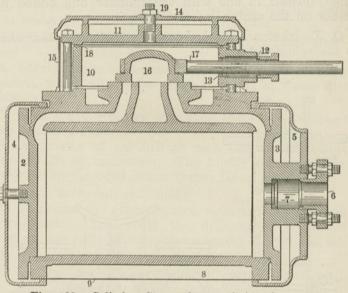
Cylinder, Steam-chest and Attachments. 1. Cylinder, 2. Front Head. 3. Back Head. 4. Front Cover. 5. Back Cover. 6. Cylinder-gland, R. and L. 7. Cylinder-gland, Bottom-ring. 8. Wood Lagging. 9. Casing. 10. Steam-chest. 11. Steam-chest Cap. 12. Steam-chest Gland. 13. Steam-chest Gland, Bottom-ring. 14. Steam-chest Cover. 15. Steam-chest Casing. 16. Steam-chest Valve. 17. Steam-chest Valve-yoke. 18. Steam-chest Joint. 19. Steam-chest Oil-pipe Stem.
